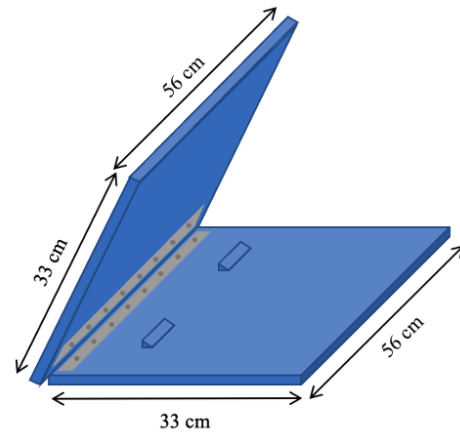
Right-side door. This is a removable door to be slid into the right side of the empty space in the cradle shown in Figure 8. The small triangular pieces work as stops for the wedges that keep the door open.
